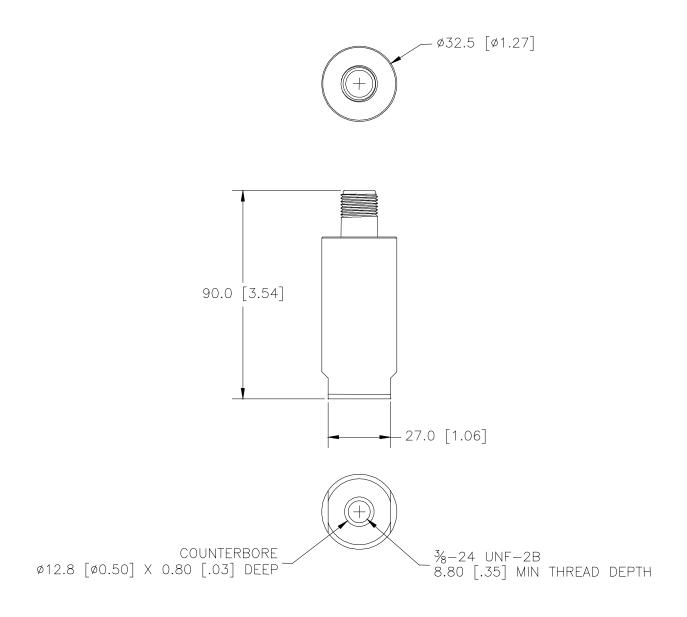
330505 System Dimensional DrawingDimensions are in millimeters (inches)
